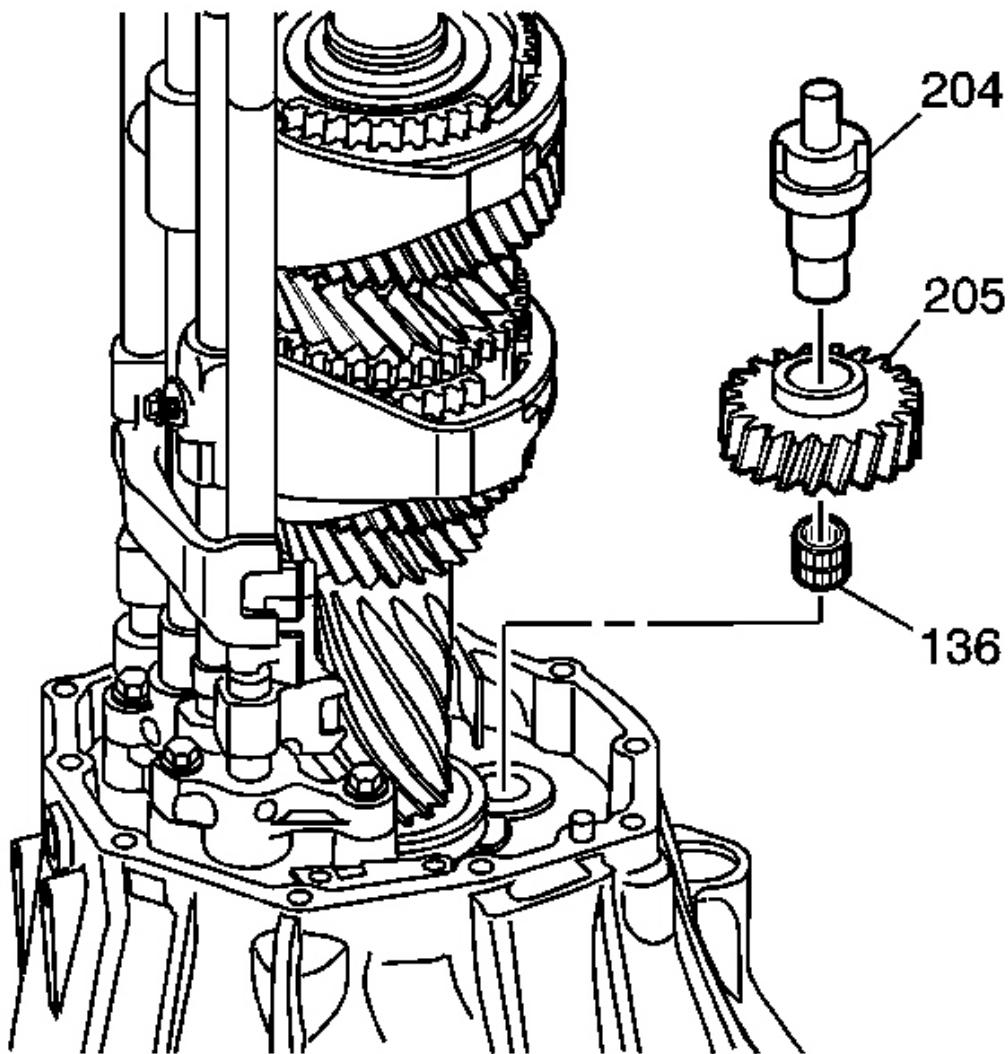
View Of Reverse Idler Gear, Bearing & Shaft
